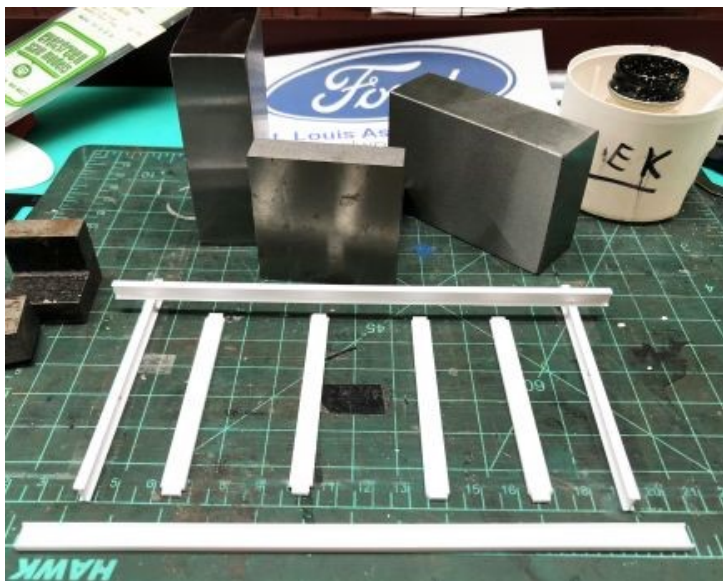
The base is constructed of I-beams with flat styrene stock notched at the ends to sit inside the I-beam ends.
